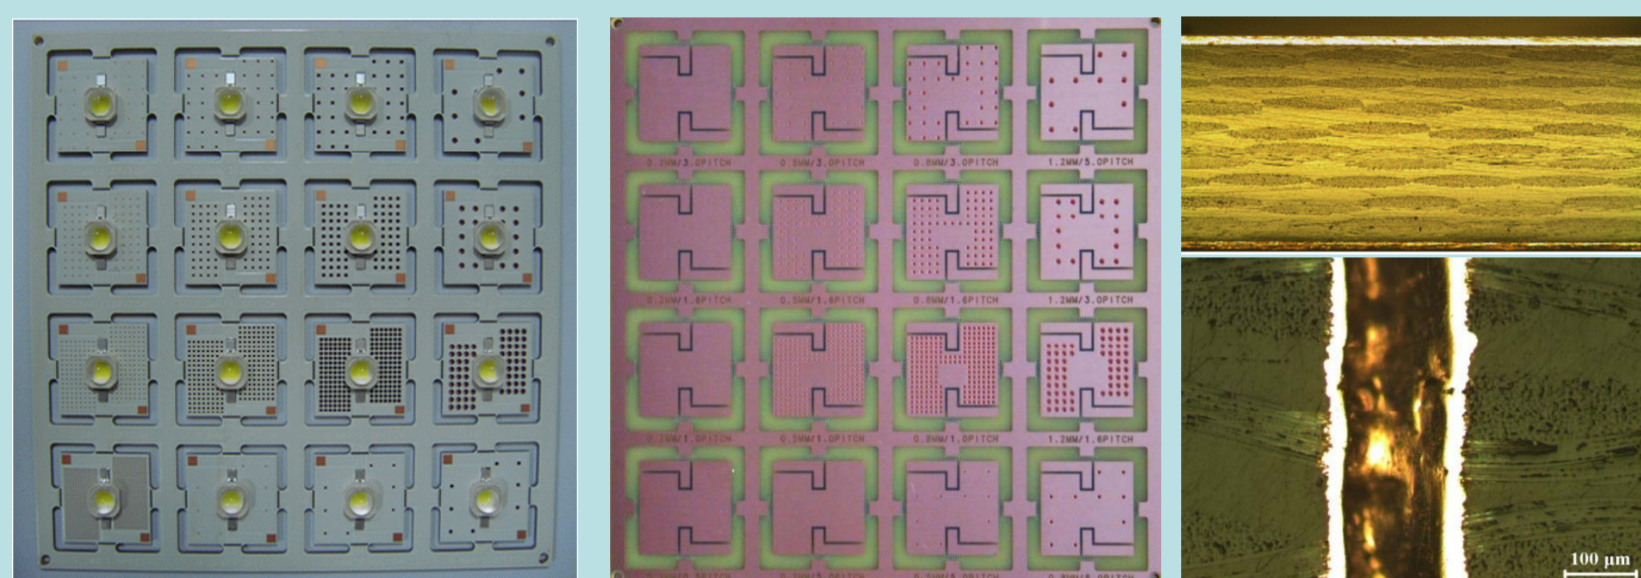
(a) Final LED assembled PCB with 16 different via design -left (b) PCB with electrodeposited Cu before white ink application -center (c) Electrodeposited Cu layer -right
